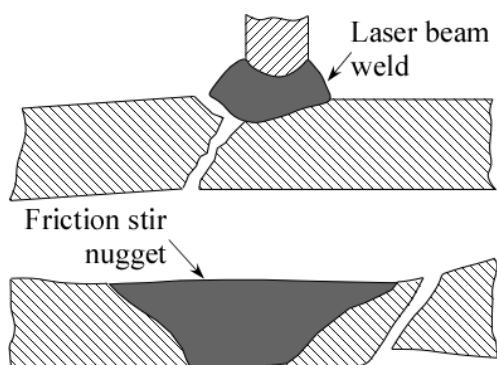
Typical damage patterns in welded thin-walled structures.
